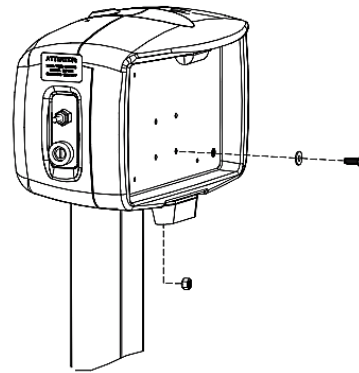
Use a drill to mount the motor cover and license plate riser.
